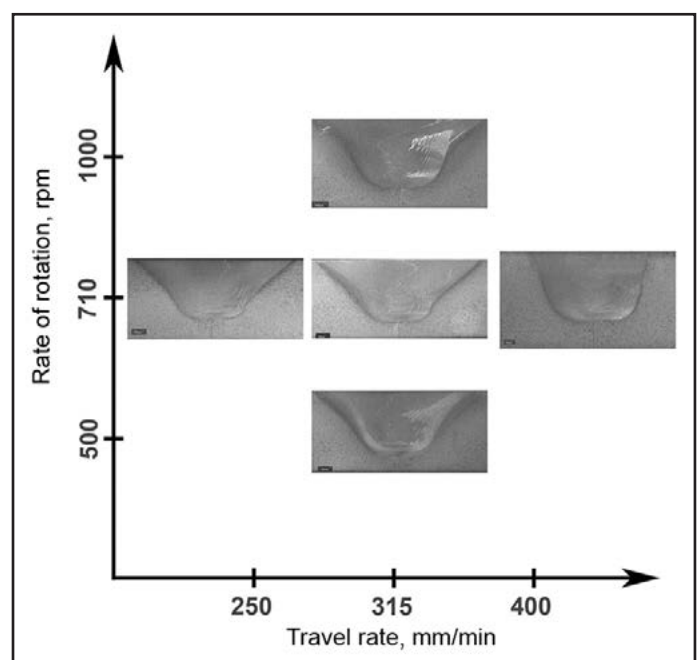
Cross-section of the welds of the test specimens in relation to the tool rate of rotation and travel rate used during the FSW process
